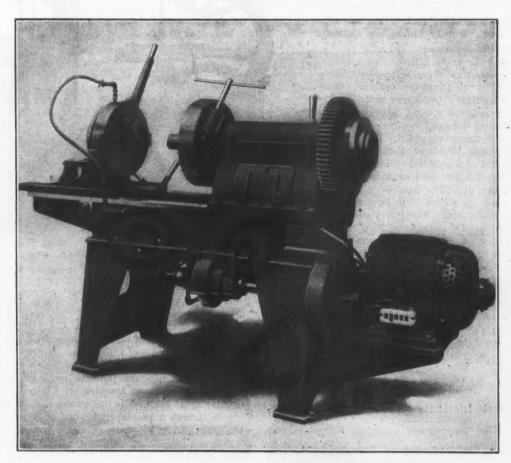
The Reverse Side of a No. 2 Williams Pipe Machine Equipped with Constant Speed Motor Drive.
